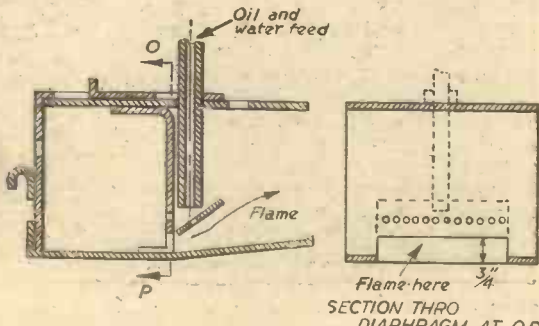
Sectional side view and cross-section of a venturi burner.
